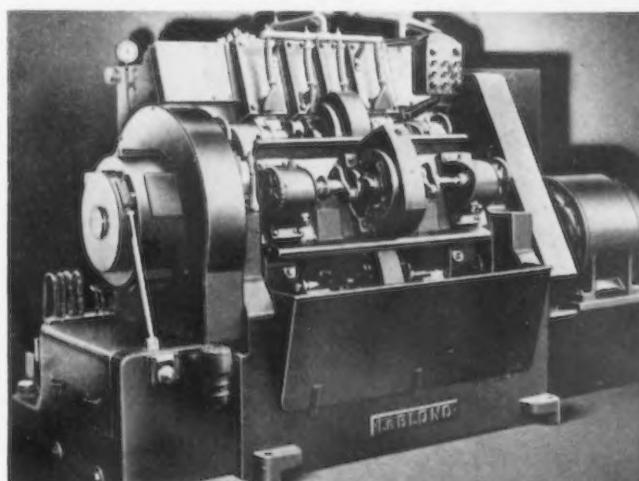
Model DM is a four-station indexing machine of the revolving drum type for finish turning crankshaft line bearings.
